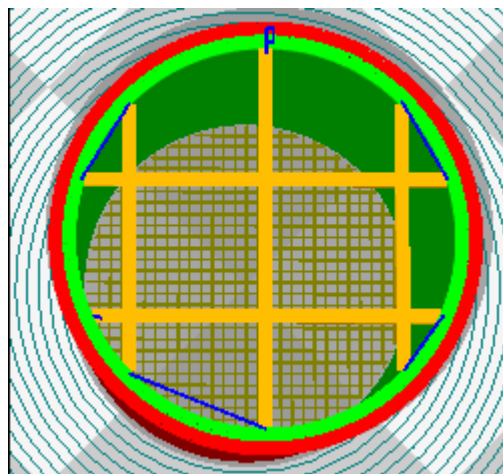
Cross-sectional view of the 20% infill cylinder specimen taken from Cura
